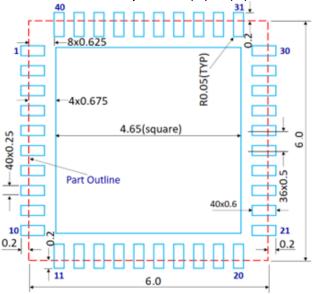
PCB Land Pattern (Dimensions are in mm)
